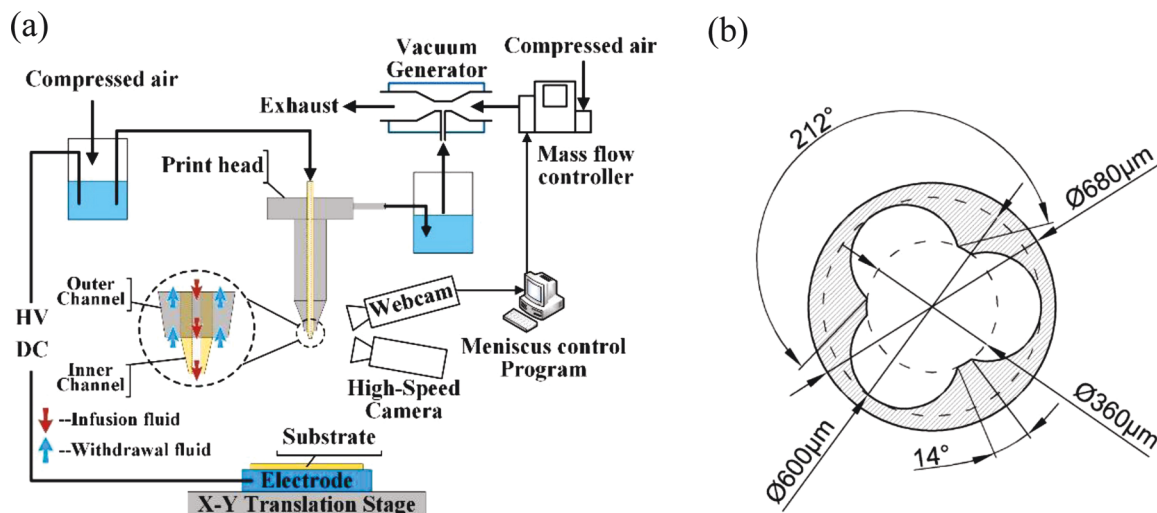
(a) Schematic diagram of the experimental setup for the coaxial EHD printing. (b) The cross-sectional view of the outer capillary.
